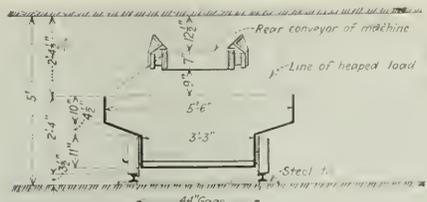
SUGGESTED SECTION FOR CAR TO BE USED FOR MACHINE LOADING A FIVE-FOOT SEAM
